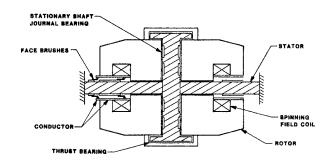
Counter-rotating rotor HPG with stator face brush actuation, spinning coil, and stationary shaft bearings - 20 MJ/m³ energy density gain over single-rotor machine
